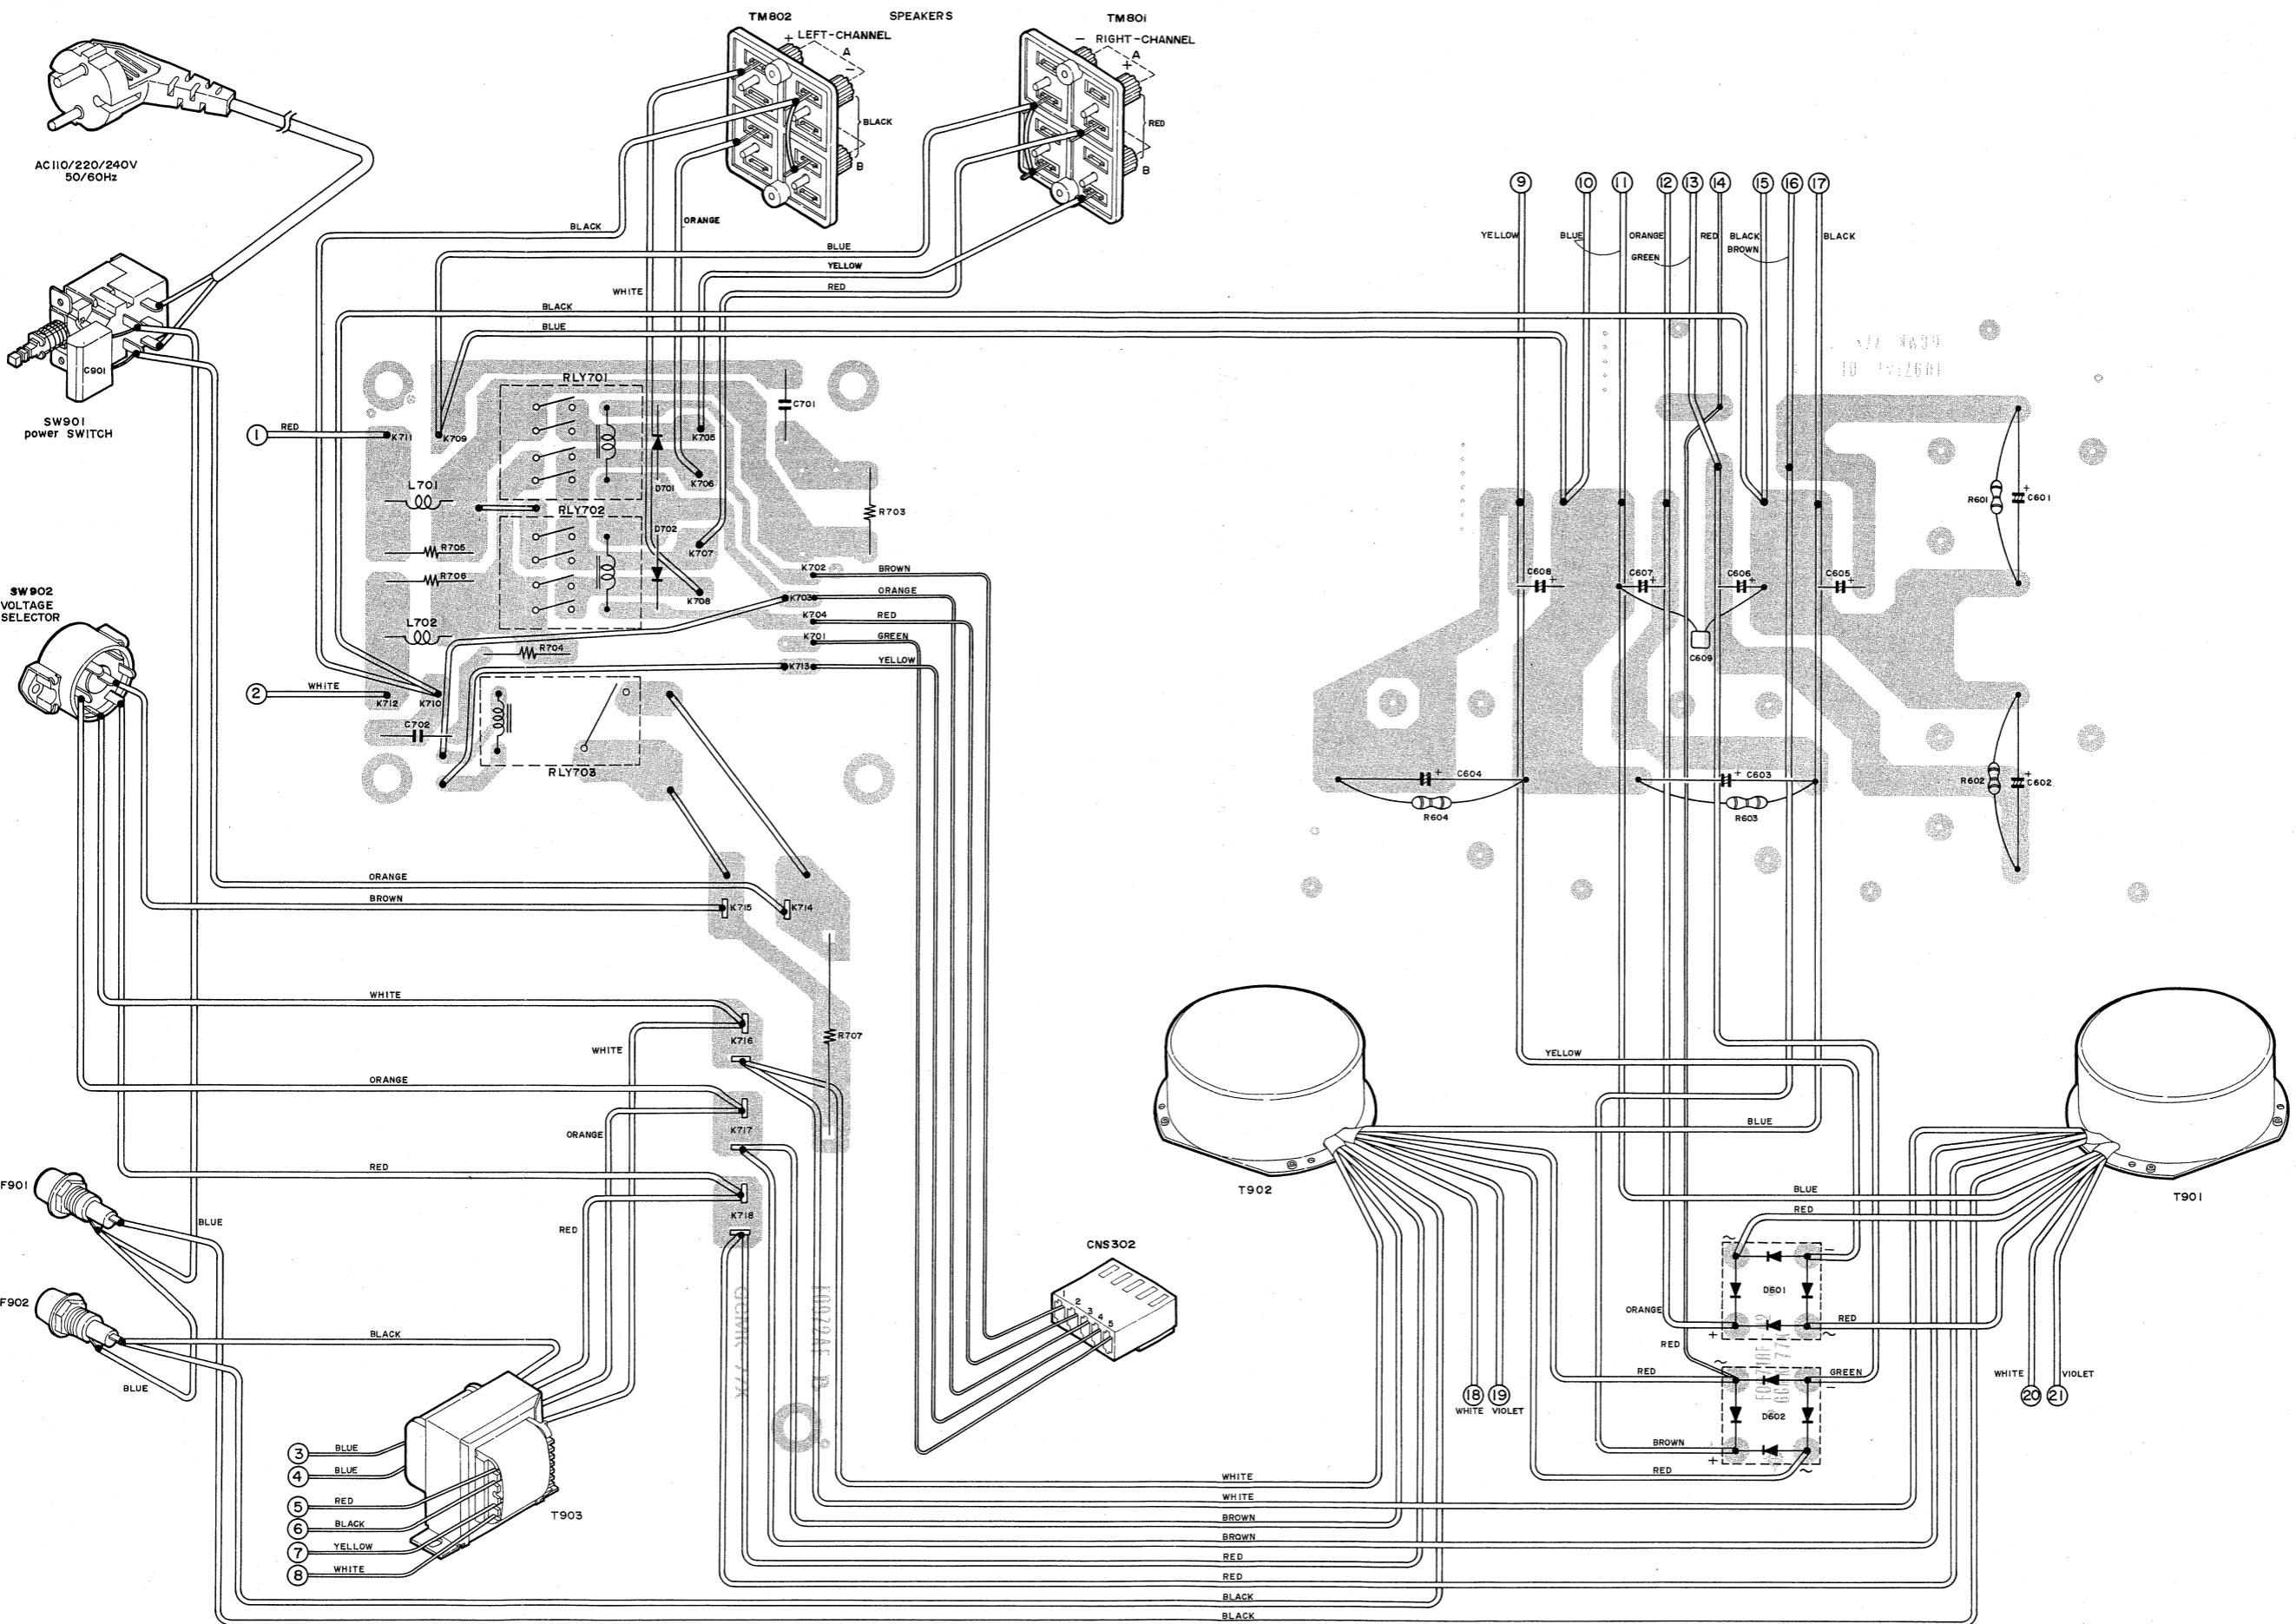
WIRING SIDE OF P.W. BOARD (POWER SUPPLY)
